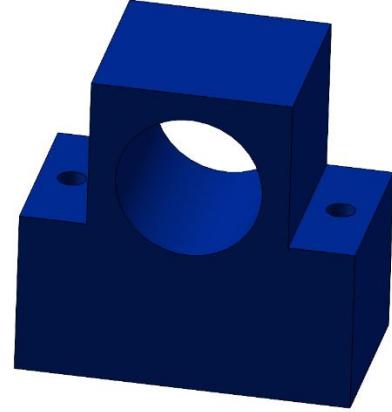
SolidWorks model of the finalized motorless-side drive roller mount.
